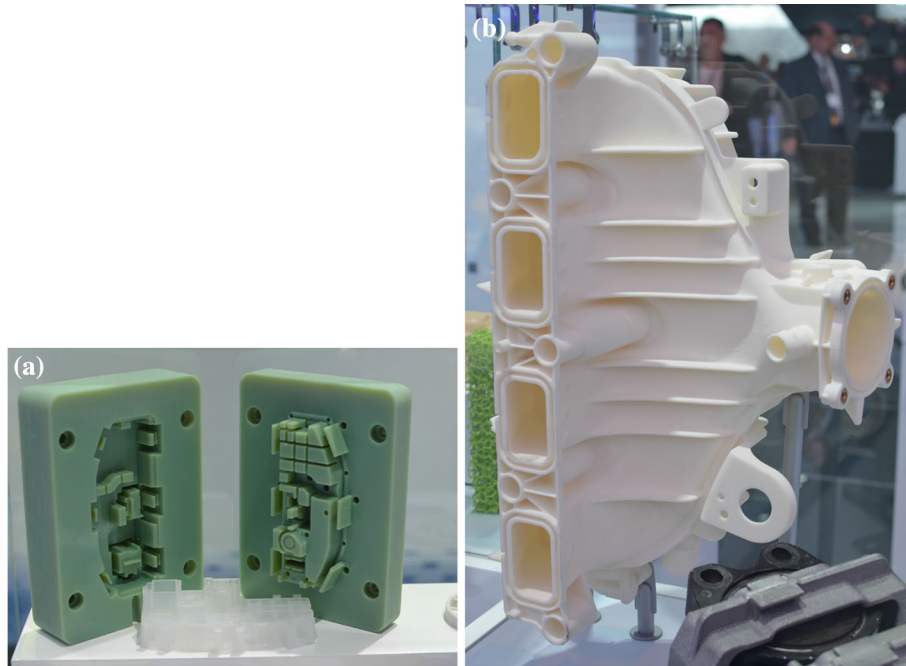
(a) Injection molding dies and (b) prototype intake manifold produced by additive manufacturing and displayed by Ford at the 2016 New York International Auto Show.
